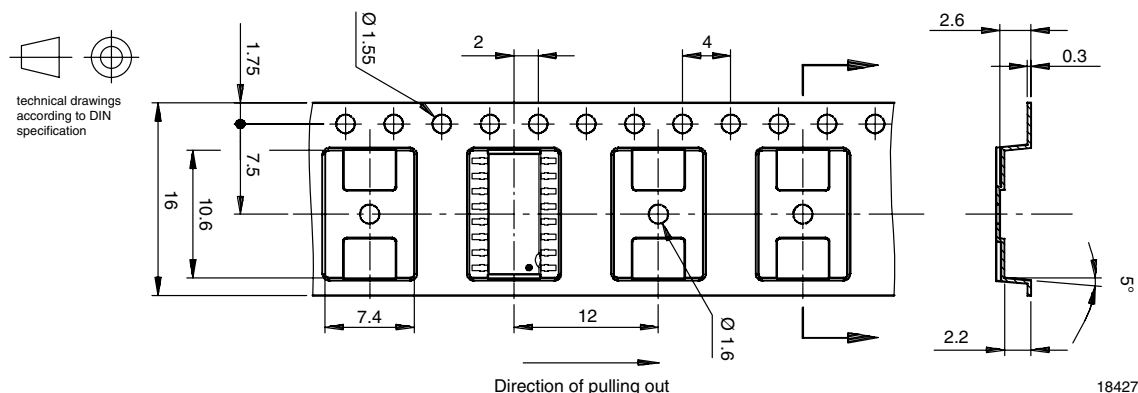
TTape and Reel Packing for TCMT460X (2000 parts per reel)
